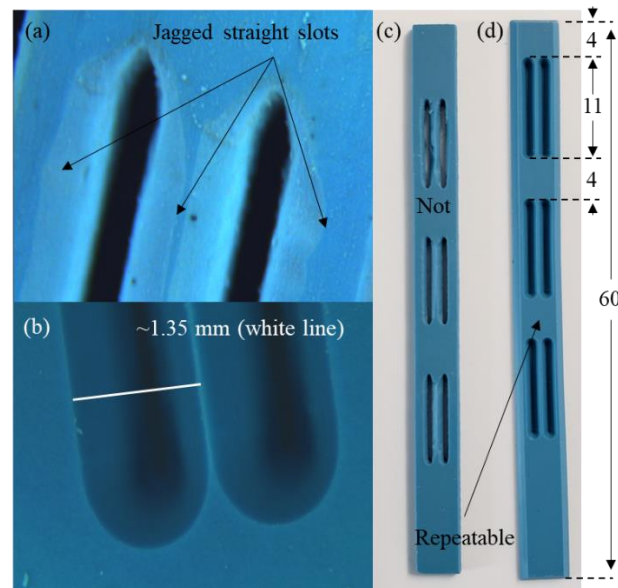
Images of the facet plates with (a) laser cut magnified image, (b) milled slits magnified image, (c) facet plate using laser cutting, and (d) milled facet plates. All dimensions are mm.
